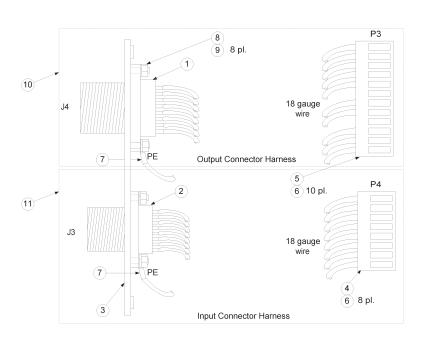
REMOTE CONNECTOR HARNESS EXPLODED VIEW
